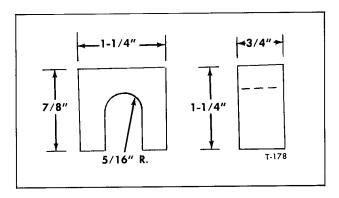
Improvised Tool (Gauge) For Measuring Release Lever Free Play
